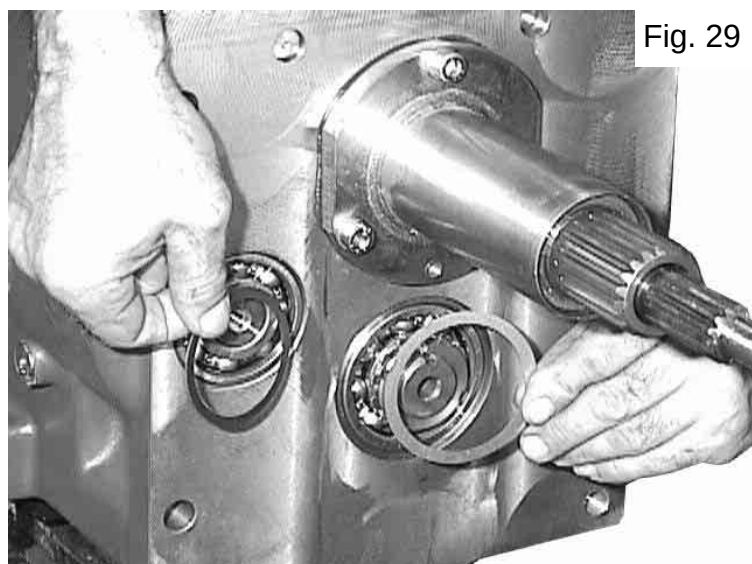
After having installed the guiding sleeve of the thrust bearings as illustrated in fig. 2-9, shim the lower shaft bearing as already described in the previous pages (the shimming ranges from 0.2 to 0.4 mm) and install the clutch bowl on the gearbox housing, tightening the relative screws to a 7.0 kgm torque value.
